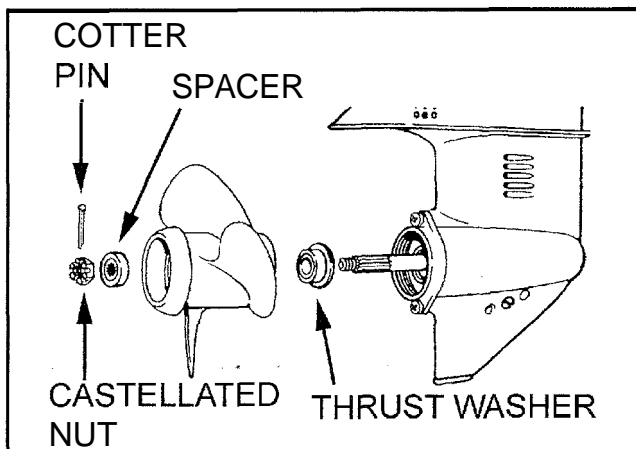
Typical propeller mounting on models utilizing a castellated nut
